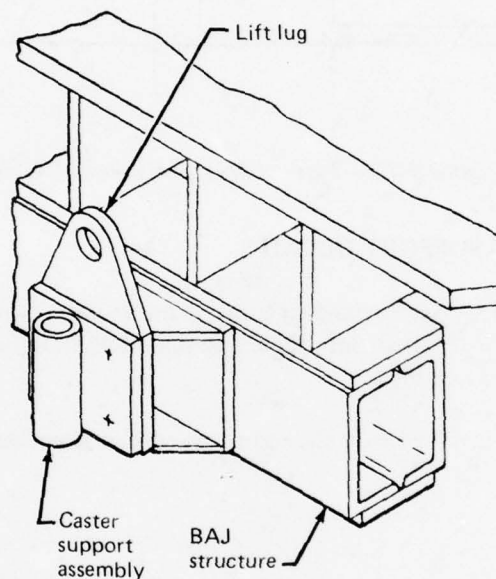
Typical Lift Lug Combined With Caster Support Assembly
